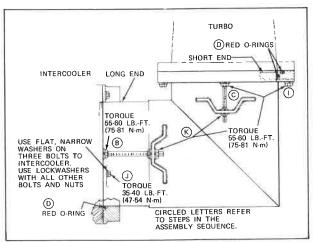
TOP VIEW OF RIGHT-HAND TURBO AIR ELBOW INSTALLATION. CIRCLED LETTERS REFER TO STEPS IN THE ASSEMBLY SEQUENCE.
